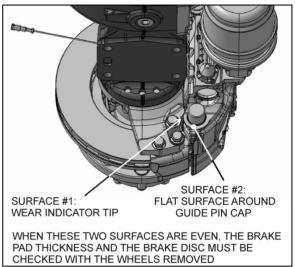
BRAKE PAD WEAR CHECK ON DRIVE AXLE
